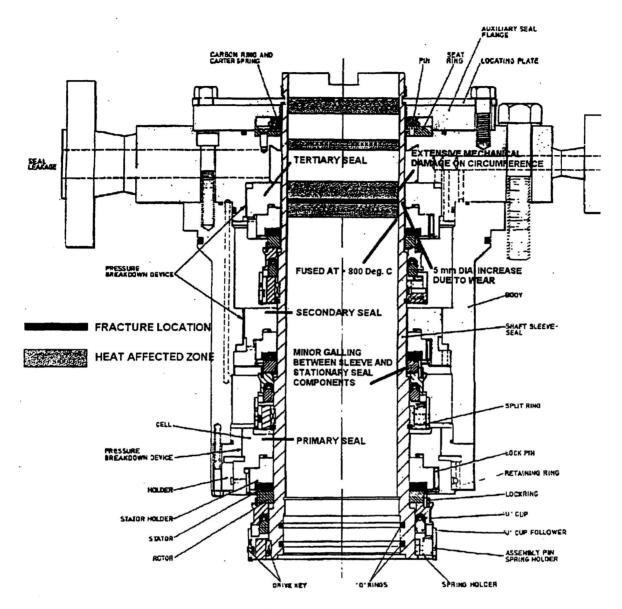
General Assembly of PHT Pump P1 Showing Location of Fracture
